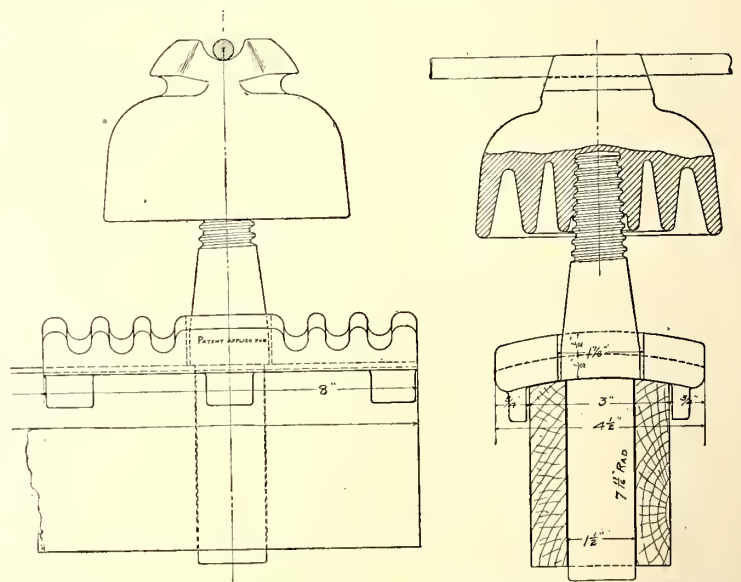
END ELEVATION AND SECTION OF AUXILIARY INSULATOR FOR HIGH-TENSION FEEDER LINES
